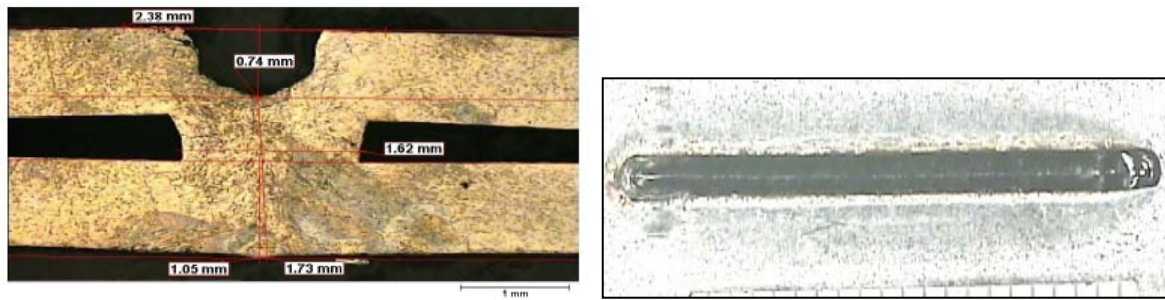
Microsection and top bead: Overlap weld: 1.0mm to 1.0mm, DX54, 0.4mm gap, showing large interface gap, undercut and no spatter
